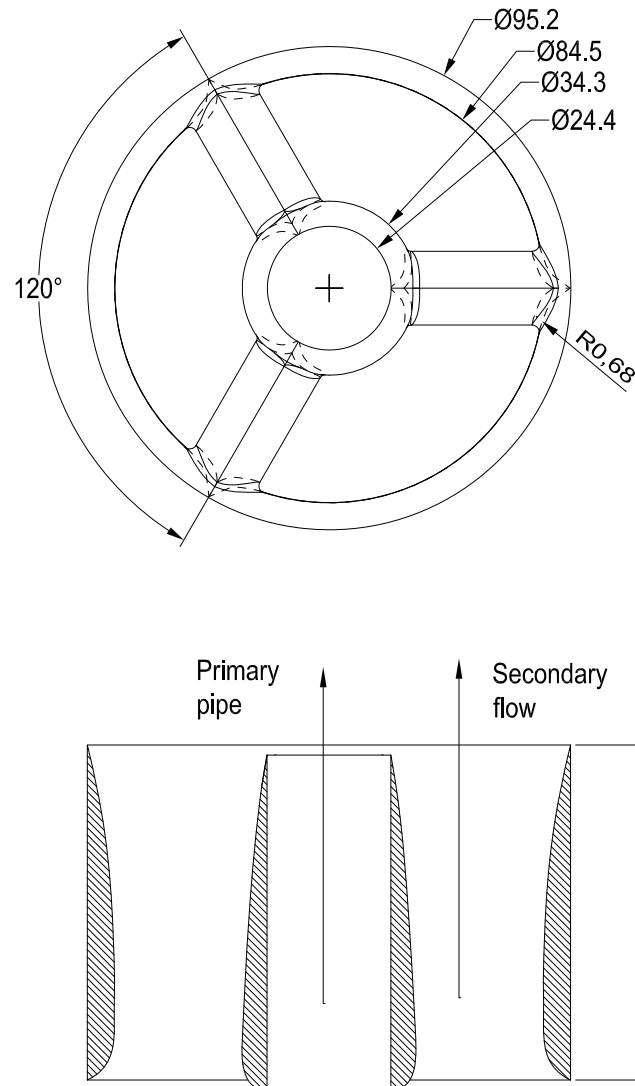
Profile of front view and section of side view of the hub with integral spokes with overall dimensions (all dimensions in mm).
